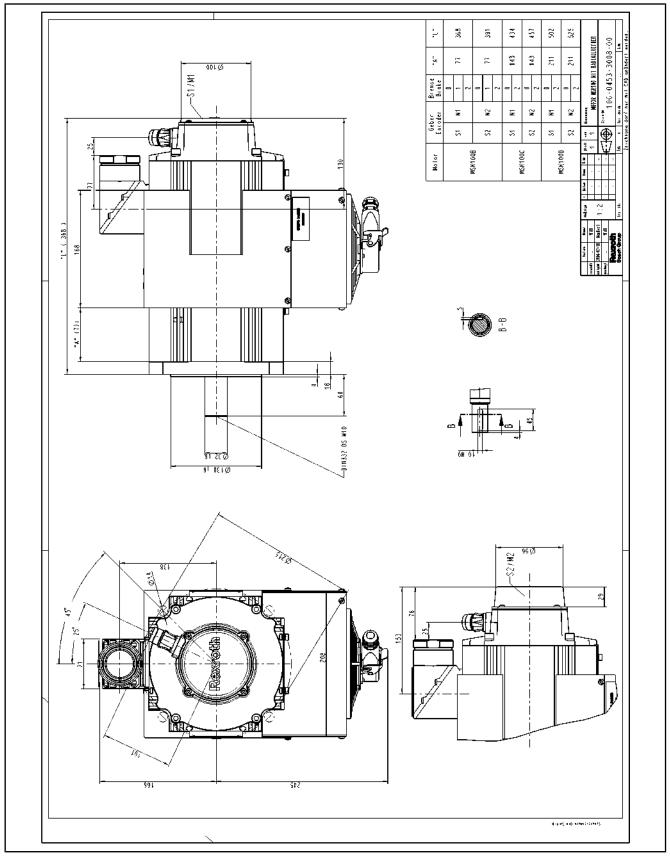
Dimension sheet MSK100 with radial fan unit
